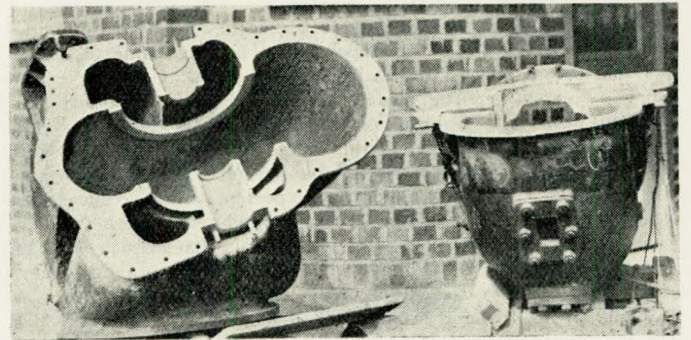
Top and bottom half castings of a circulating pump built up with 140lb. of bronze on flanges, bearing housings, etc.
